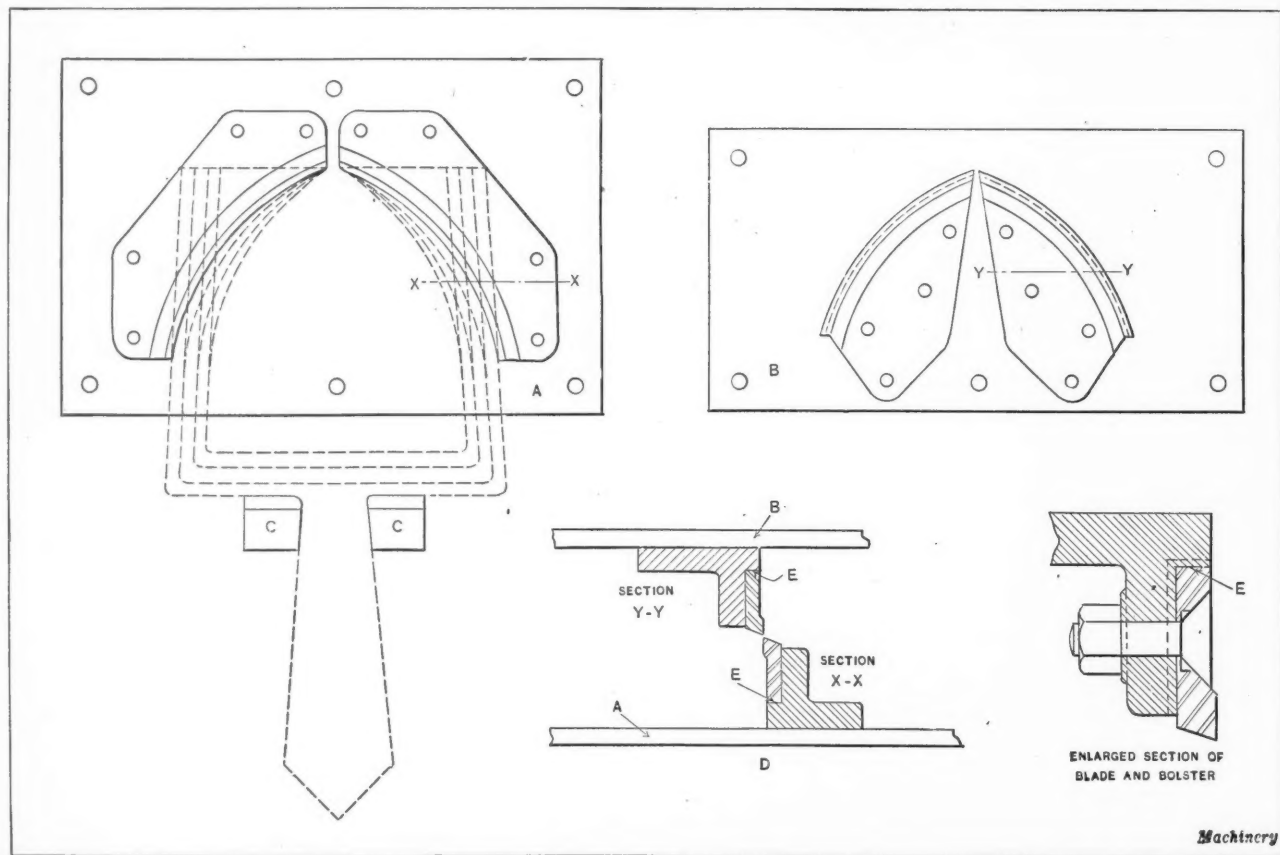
Arrangement of Blades of Trimming Dies used in the Manufacture of Shovels
